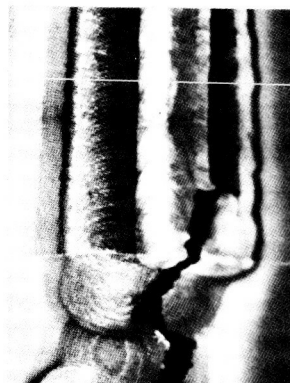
Typical Fracture Modes for Tensile Tests of GTA-DCSP Welds in 1.00-Inch 2219-T87 Aluminum Plate⁽²⁵⁾
